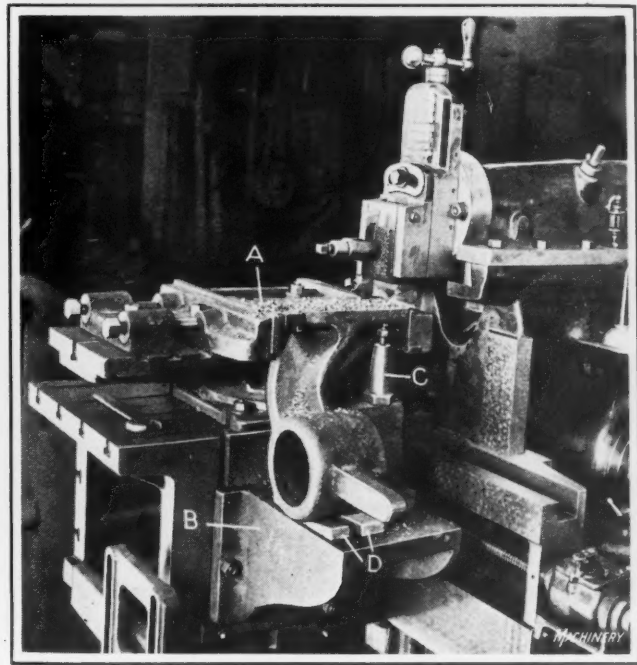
Planing and tonguing the Face of a Grinding Machine Driving Shaft Supporting Bracket
